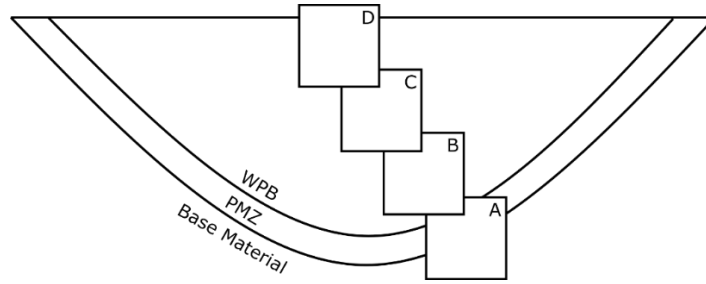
Schematic weld track demonstrating the location of images.
